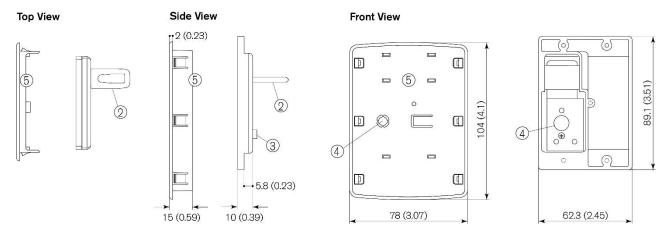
Dimensions of the GAT NET.Lock BoltSet 7200
